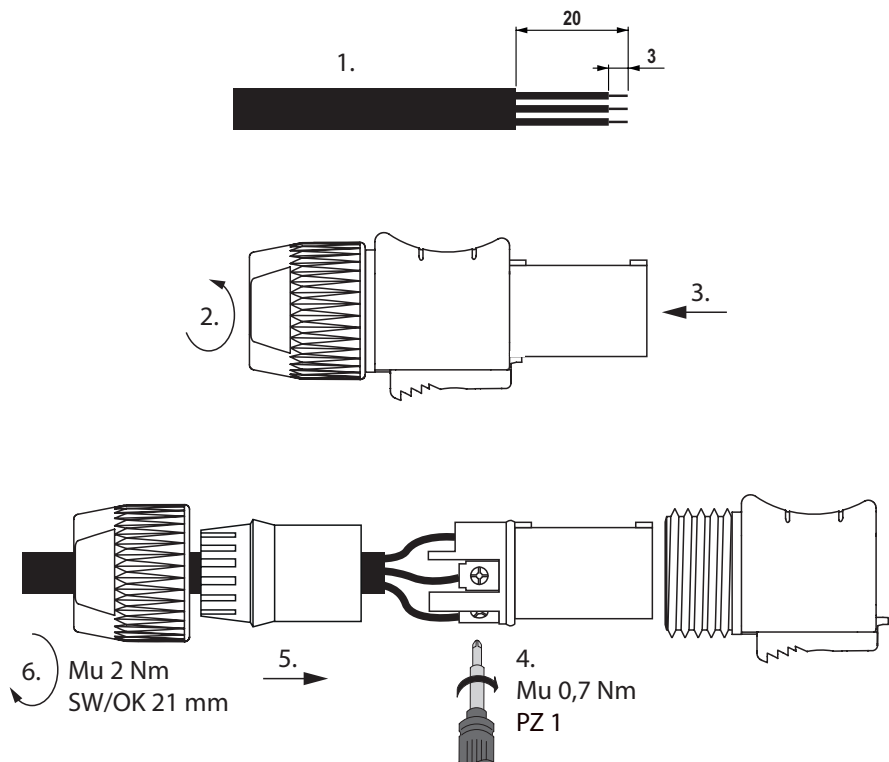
Power supply connector (Mu = torque, SW/OK = wrench size)
